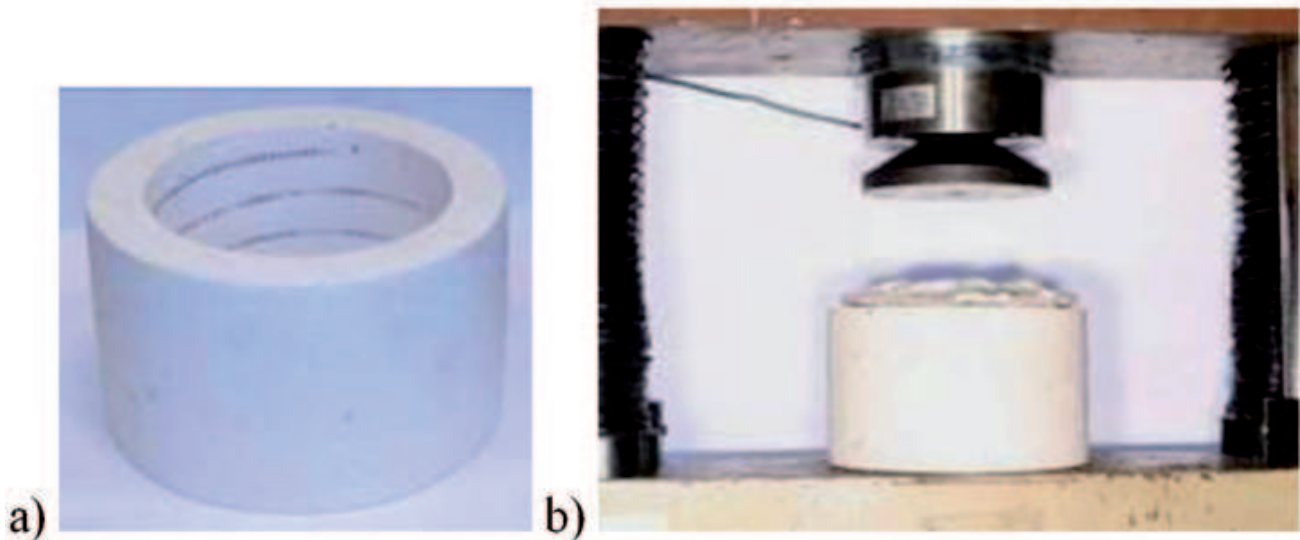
Stand for ECAP tests: a) furnace and b) stand for hot ECAP tests on TiraTest press
